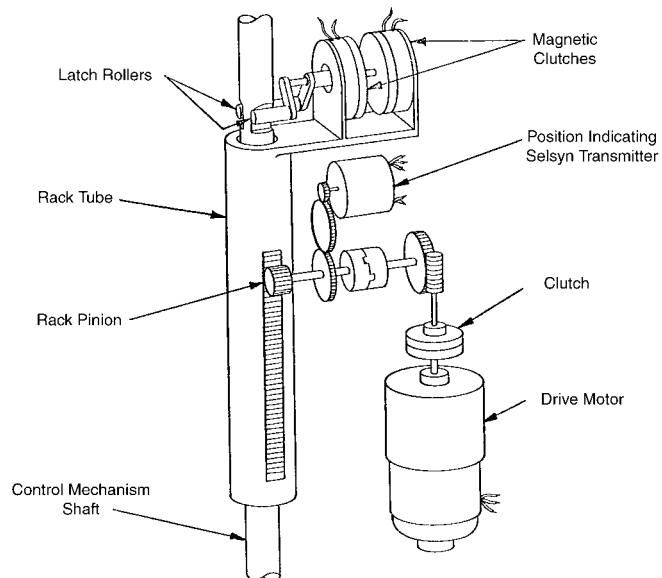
CONTROL ROD GRIPPER MECHANISM.
